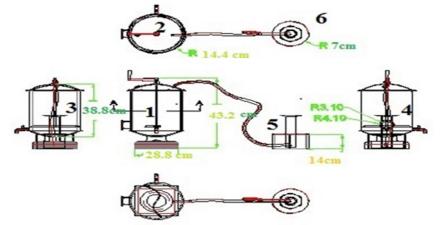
Plate II: Detailed drawing of the developed bio-digester (1. Front elevation of bio-digester; 2. Plan; 3. Left elevation; Right elevation; 5. Front elevation of gas holder; Plan view of gas holder)
